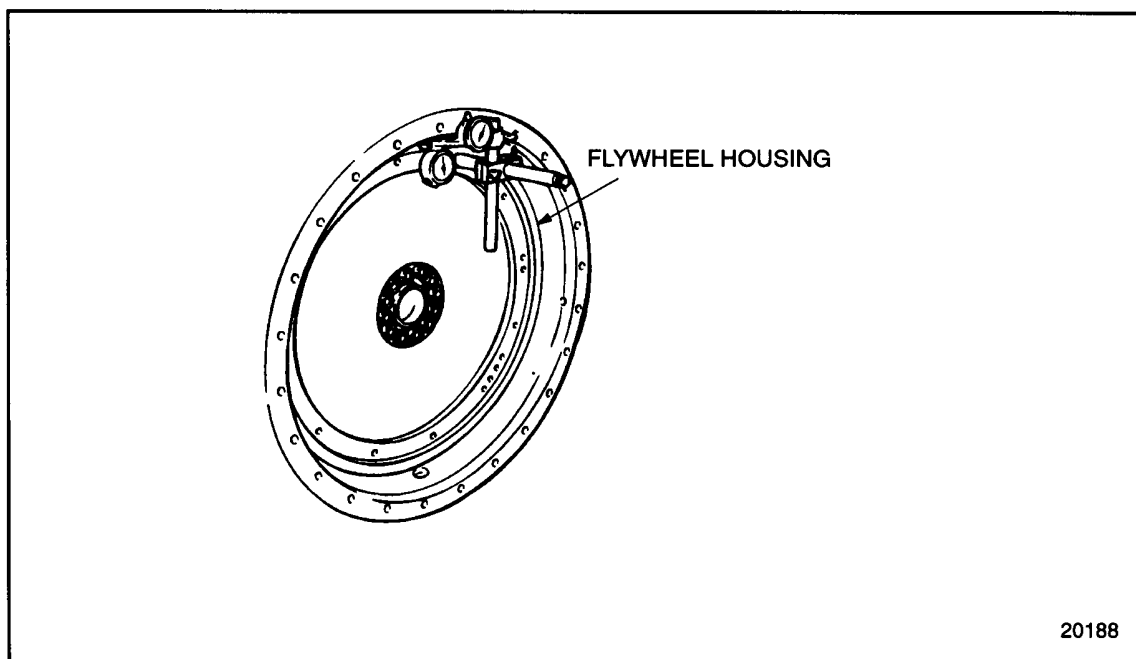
Measuring Flywheel Housing Bore Concentricity
